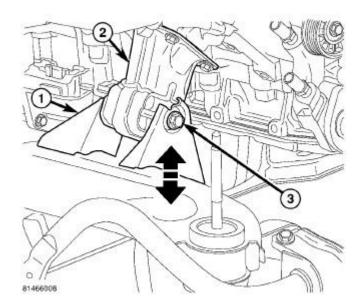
ENGINE MOUNT BOLT Courtesy of CHRYSLER LLC
